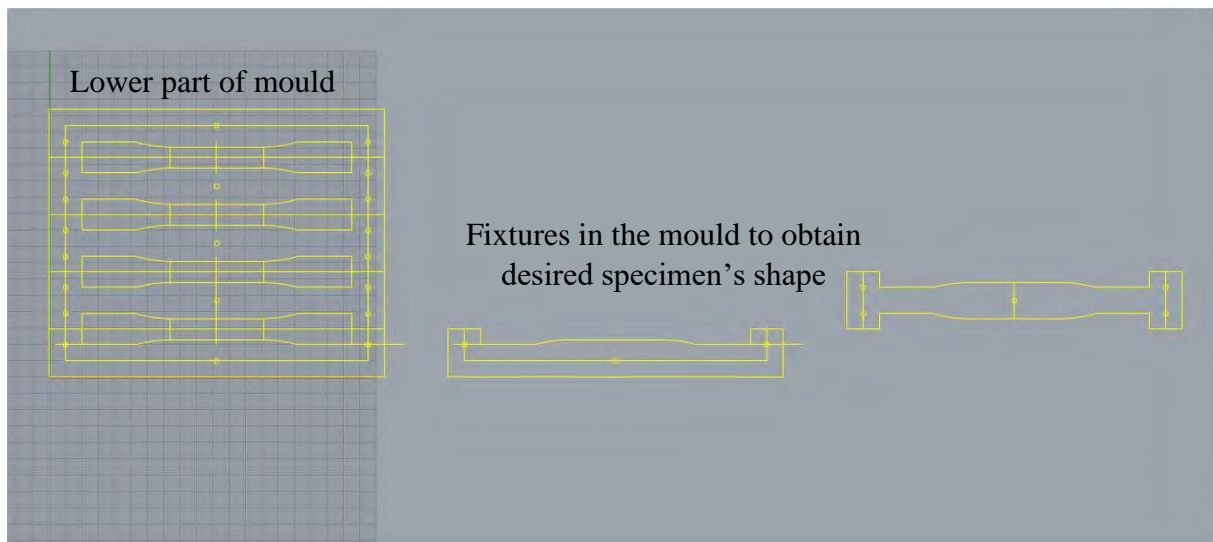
Mould drawing drawn by SolidWorks® to fabricate the carbon fibre specimen.
